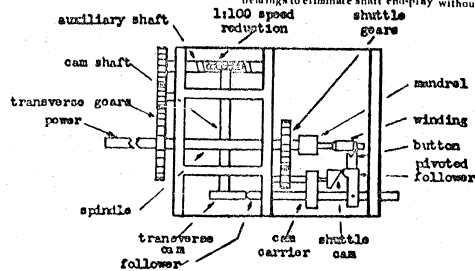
Solenoid Winding Machine converted to Progressive-universal.
